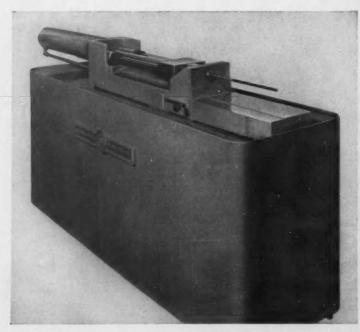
Self-contained Red Ring pneumatically operated broaching fixture for economical production of small parts
